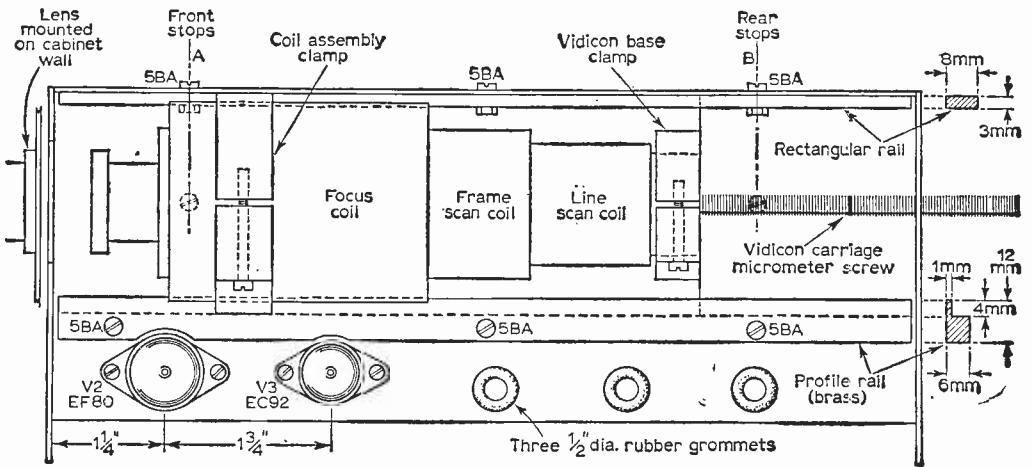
Main chassis layout and assembly details of vidicon carriage in guide rails.
